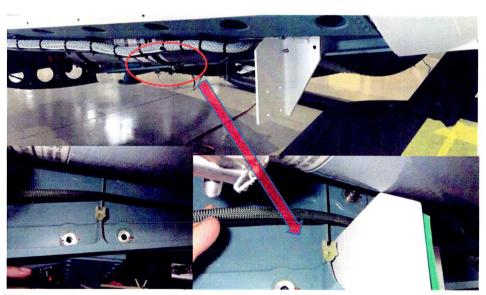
L/H AFT ANGLE ASSEMBLY
